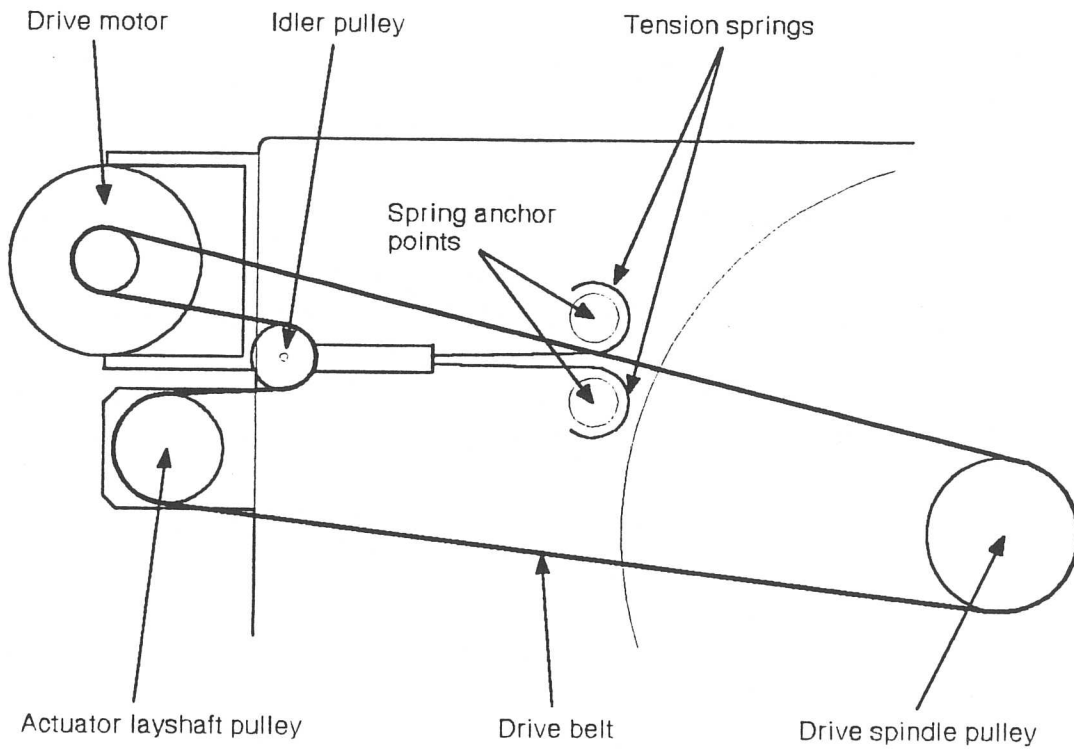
Drive-belt arrangement of 5444 Disk Storage Drive
